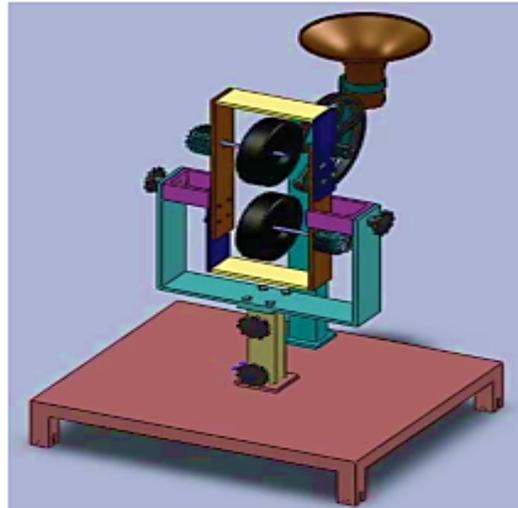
Computer model of volleyball throwing machine prototype showing ball shooter and ball feeder
